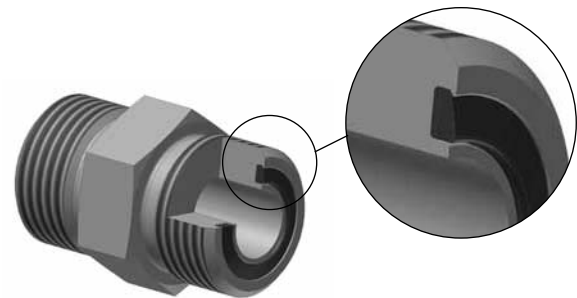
Captive O-ring Groove (CORG) Cutaway with Parker's trap seal
